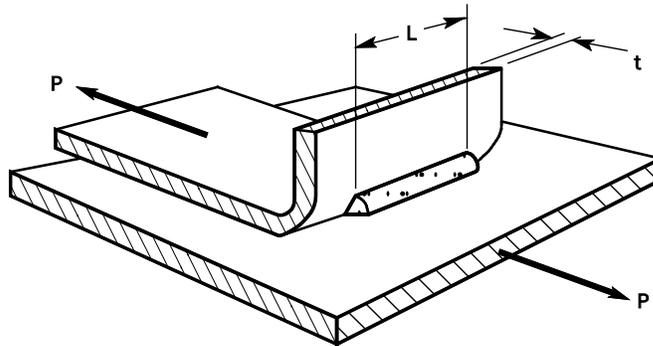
Flare Bevel Groove Weld
